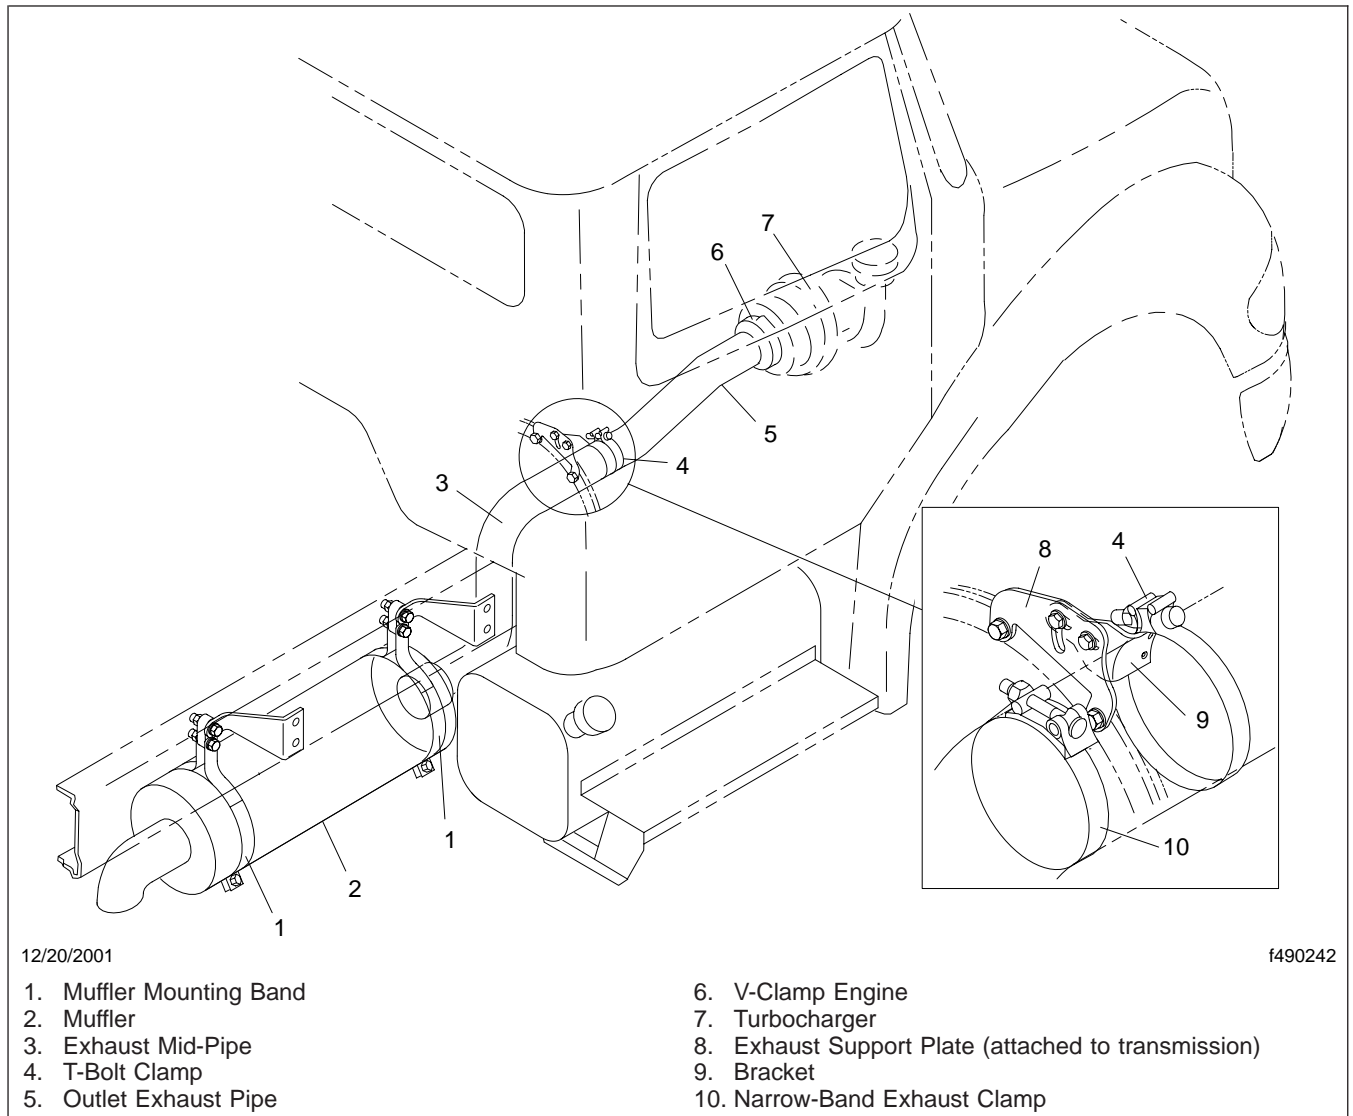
, Horizontal Exhaust Mounting (Caterpillar 3126 engine)
